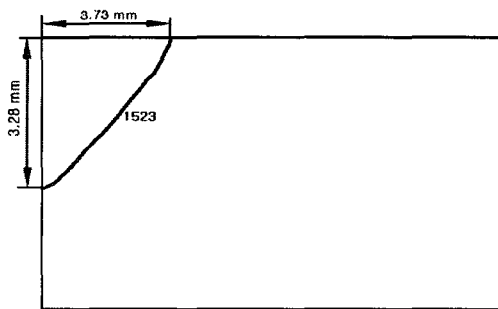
Liquid-solid interface of the GMA welding process at 1325K heat source
